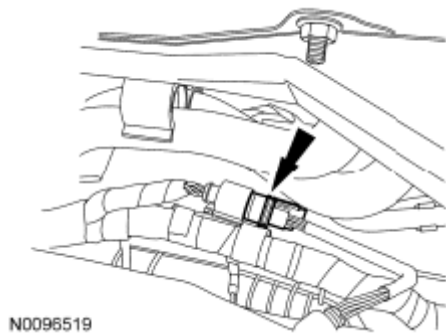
Locating RH Heated Oxygen Sensor (HO2S) Electrical Connector
